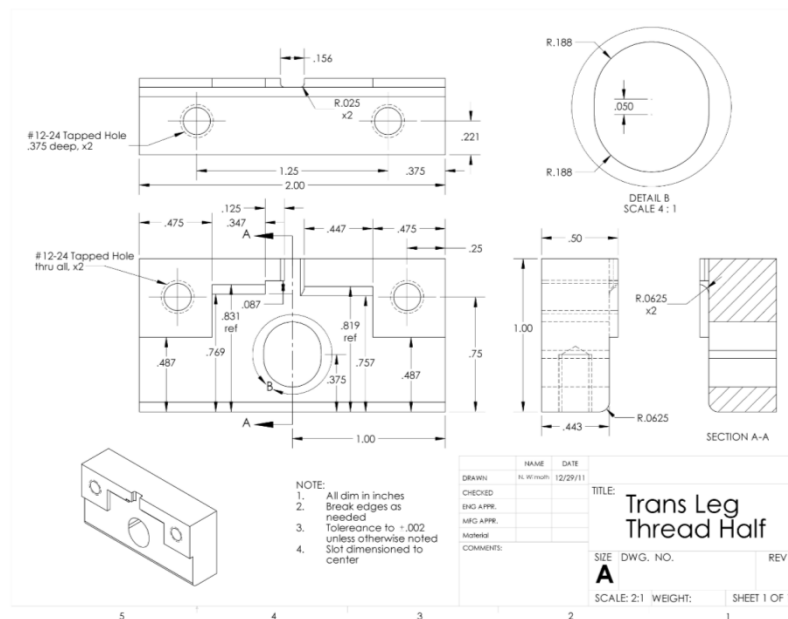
Transverse Specimen Fixture Half with Upper Threaded Holes
